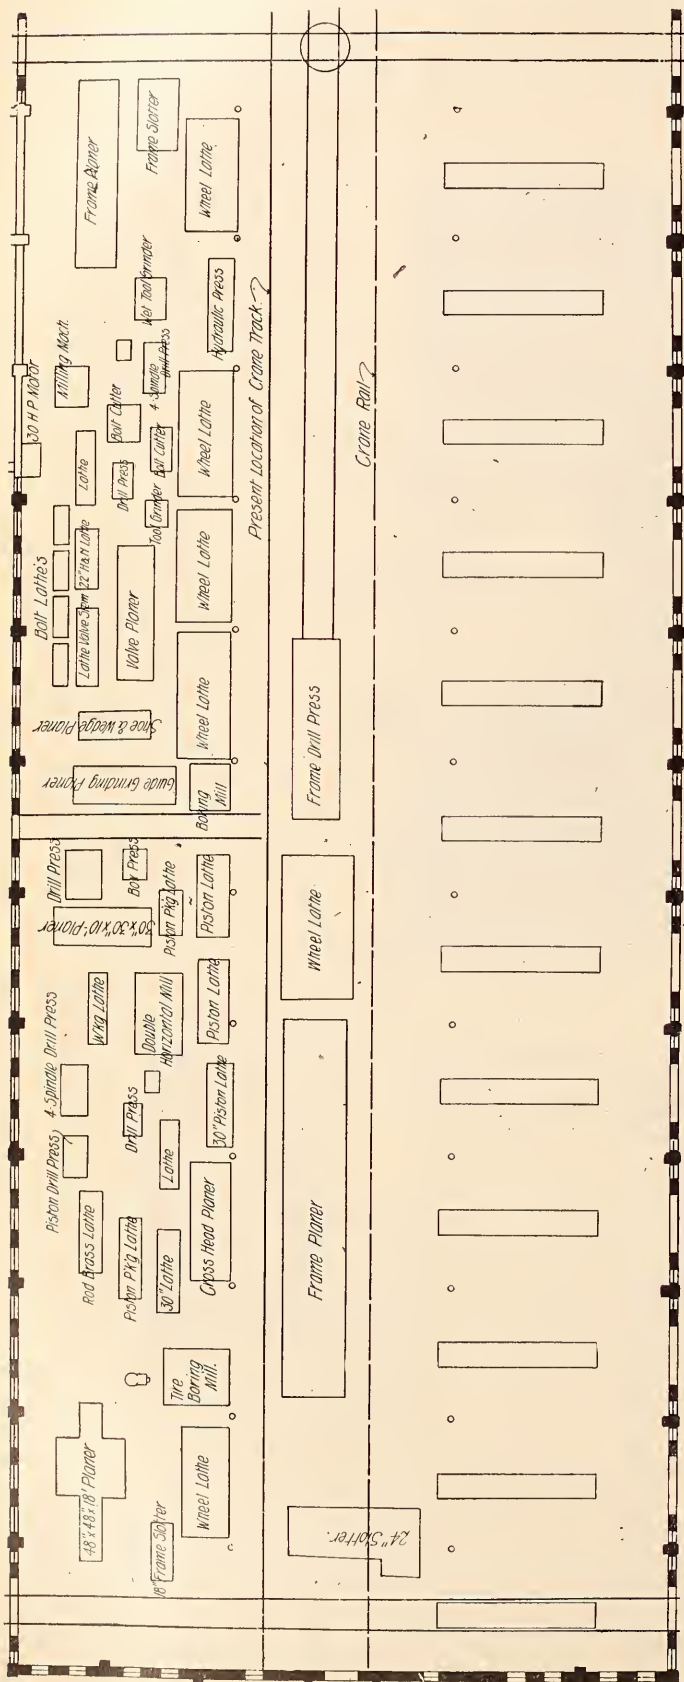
PLAN OF OLD SECTION OF MACHINE AND ERECTING SHOP, C., M. & St. P. Ry.
